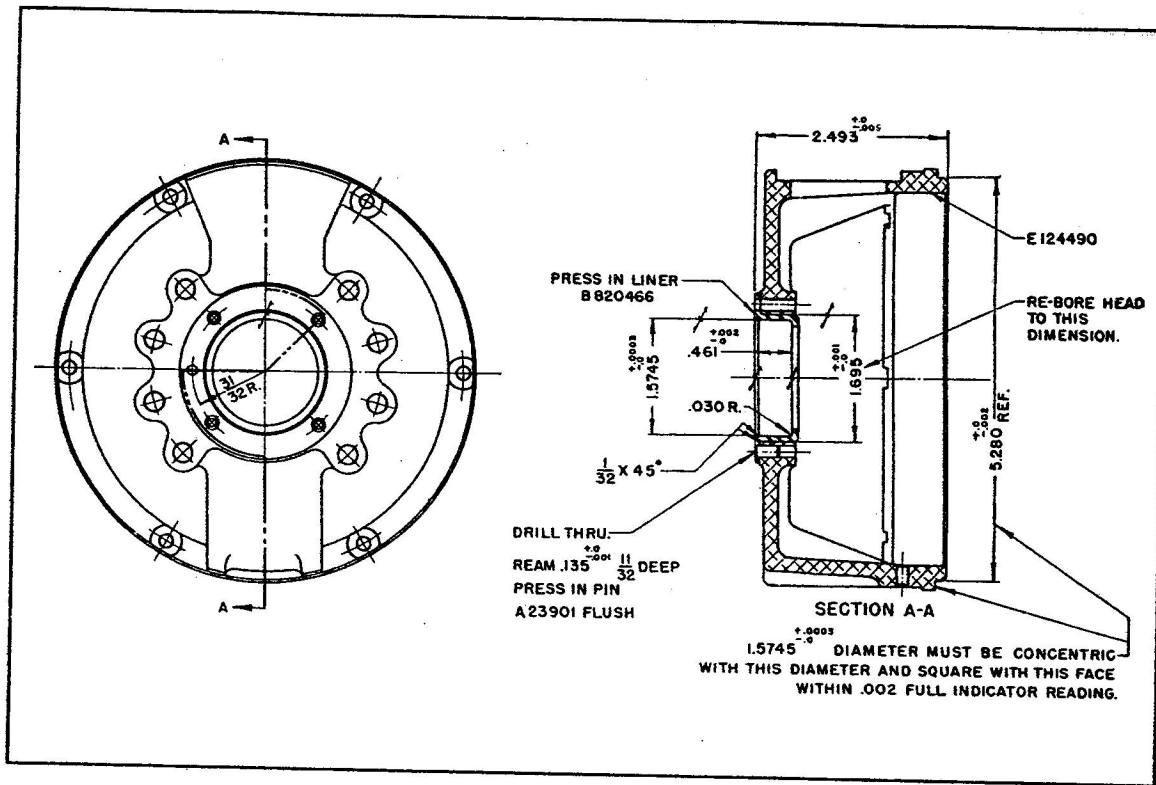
Replacement of Bearing Liner in Front Head of AAF Type M-3 Generator
